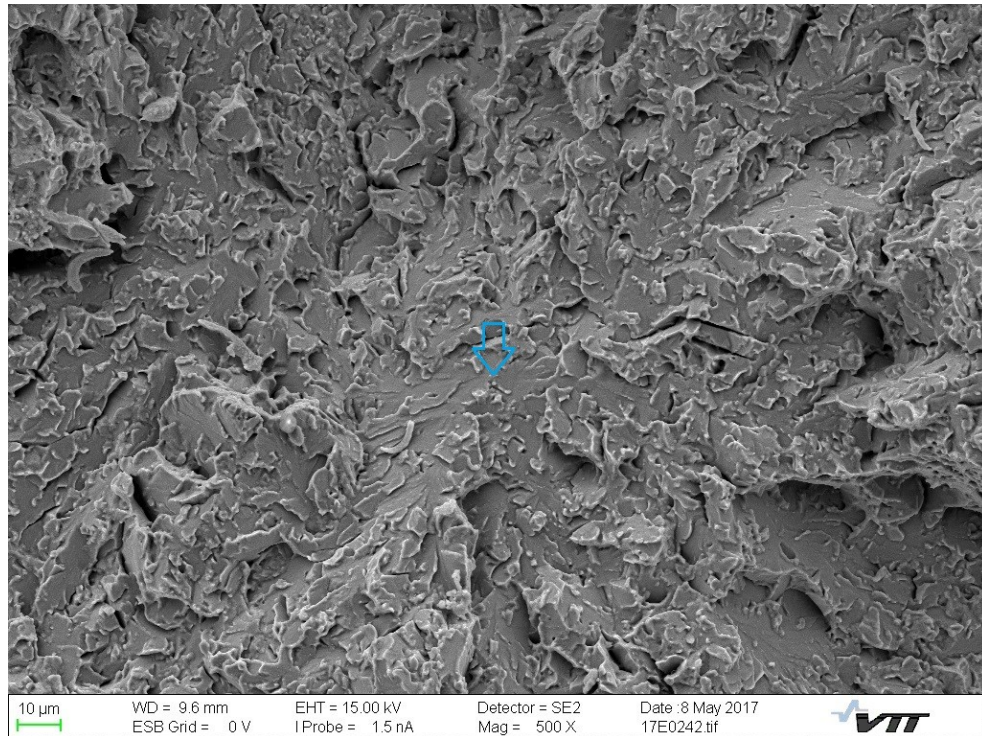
shows the fatigue pre-crack and cleavage fracture.
